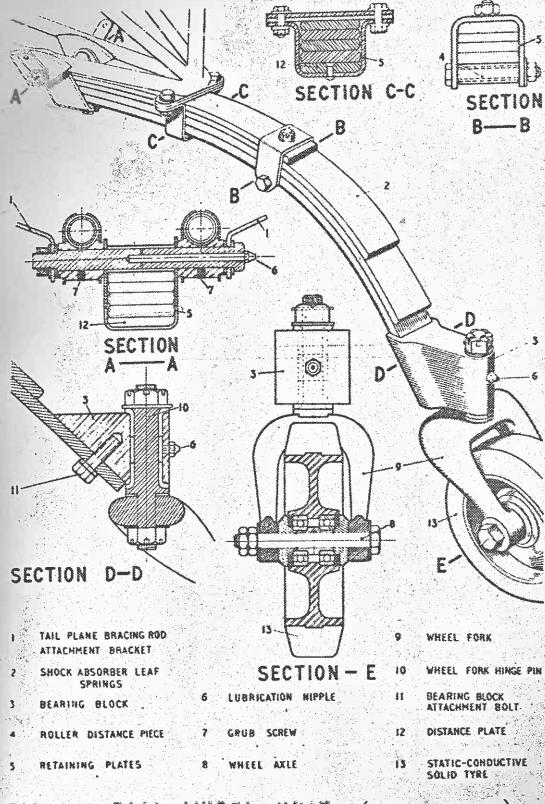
TAIL WHEEL UNIT (LATER AIRCRAFT)
